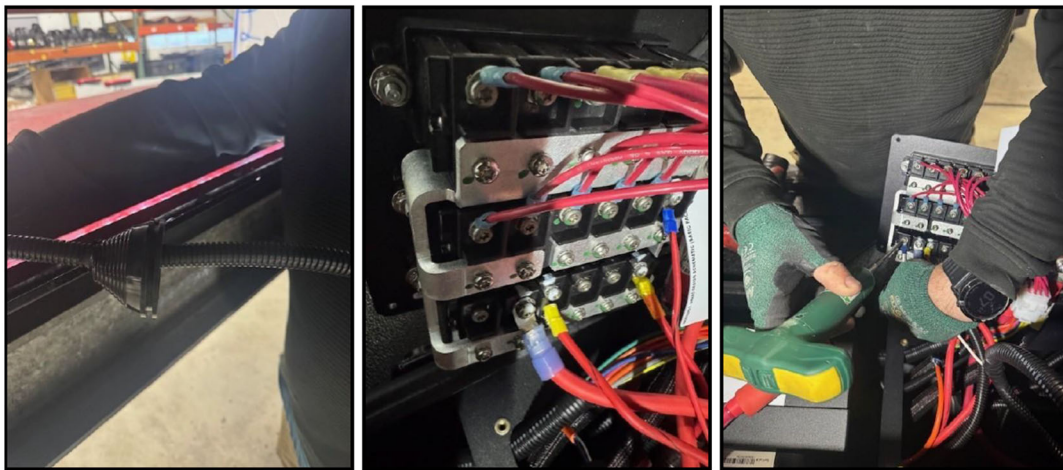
Harness routed through spare rubber grommet in step box wall.
